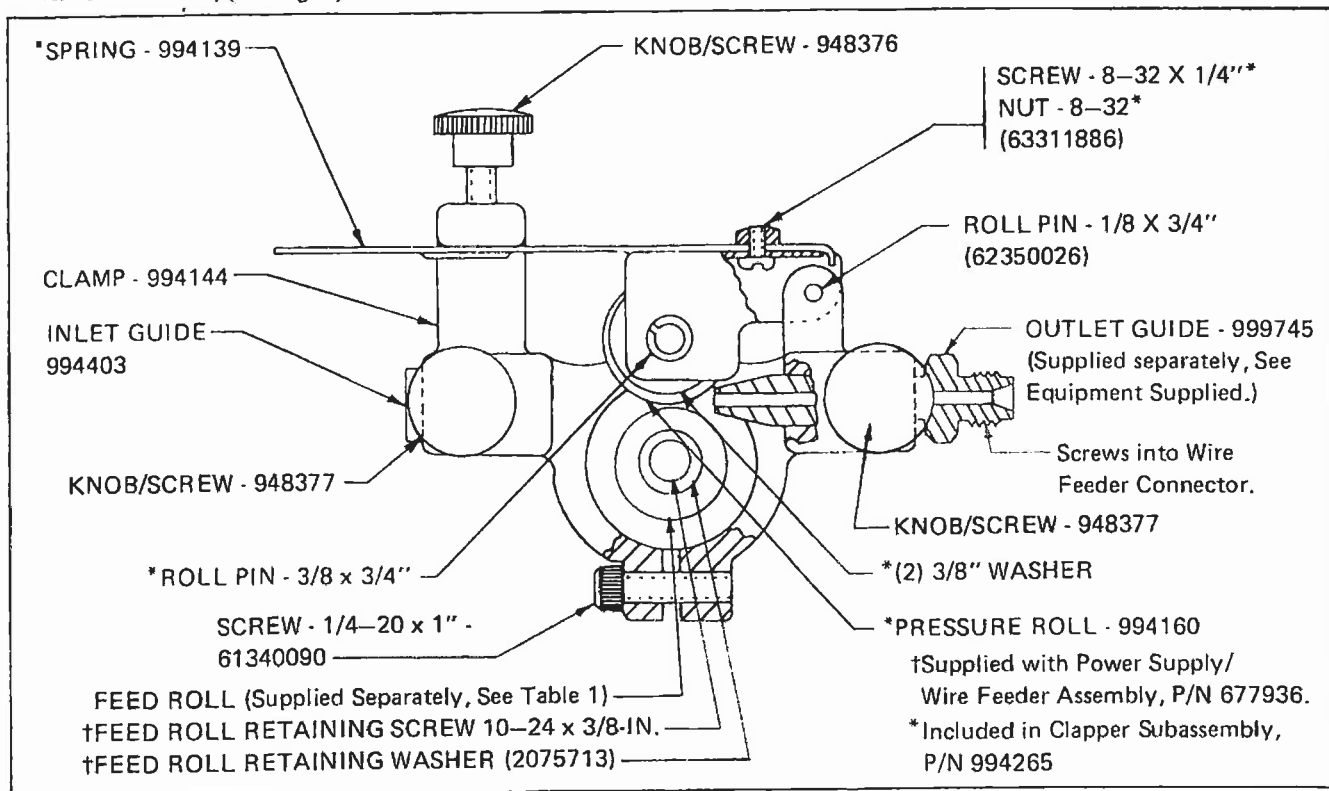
Pressure Roll and Clamp Assembly, P/N 994264, with Feed Roll Installed
